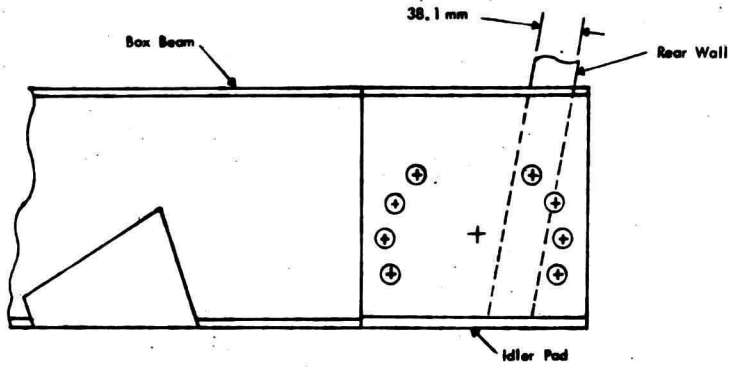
SIDE VIEW OF LEFT IDLER PAD
